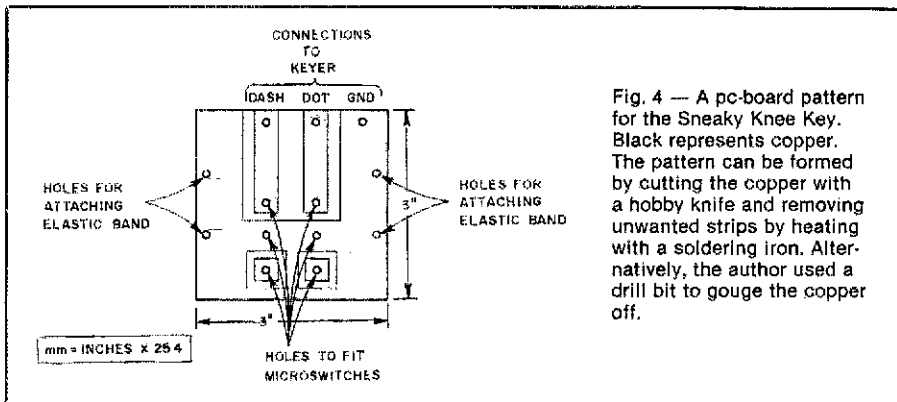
A pc-board pattern for the Sneaky Knee Key. Black represents copper. The pattern can be formed by cutting the copper with a hobby knife and removing unwanted strips by heating with a soldering iron. Alternatively, the author used a drill bit to gouge the copper off.
